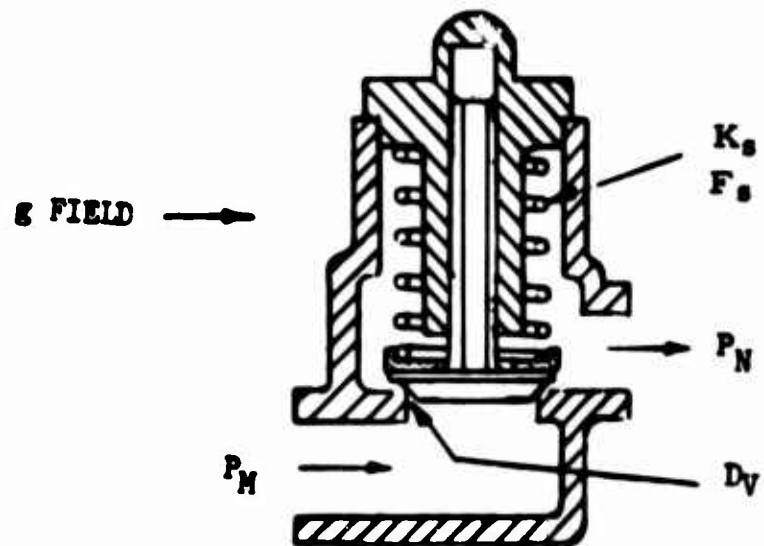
Rotor Tip Fuel Control - Pressurizing Valve.
